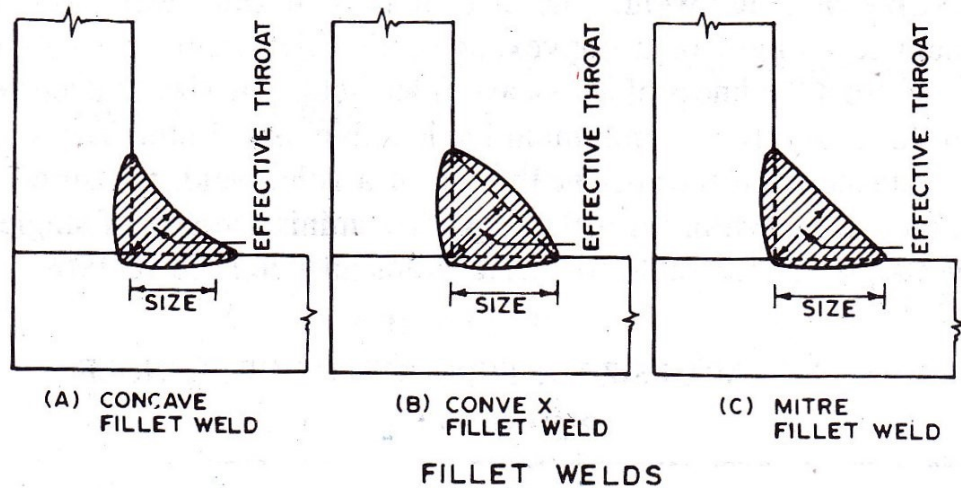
Fillet weld size for checking (Indian council of agricultural research 2013)
